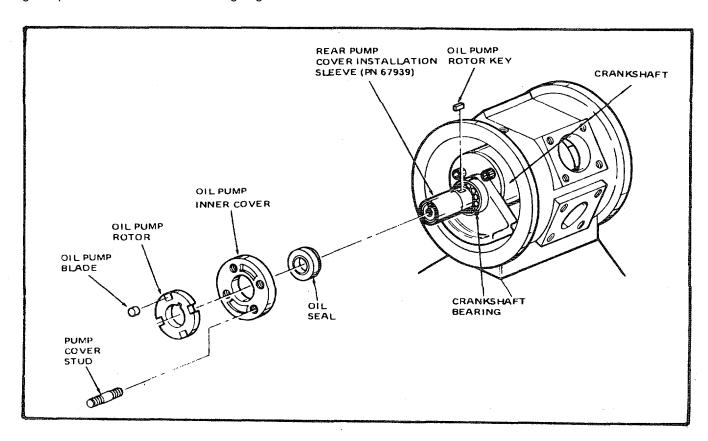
Non Drive End Cover, Oil Pump and Oil Seal Installation
